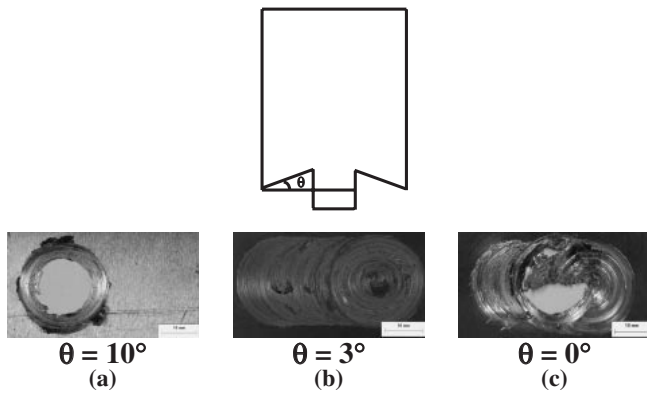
Appearance of the friction stir welded specimen at 150 rpm and 100 mm/min with various recessed angles of the shoulder surface: (a) 10° , (b) 3° , and (c) 0° .
